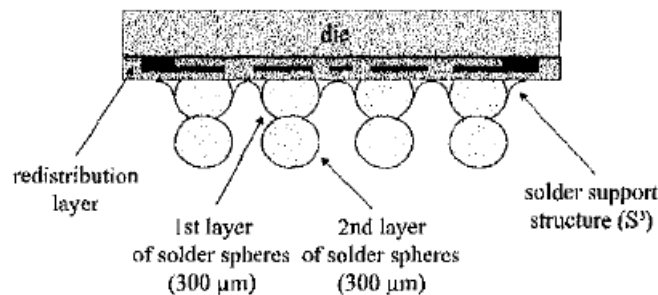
Motorola's wafer-level chip scale packaging processing (courtesy of Motorola).
